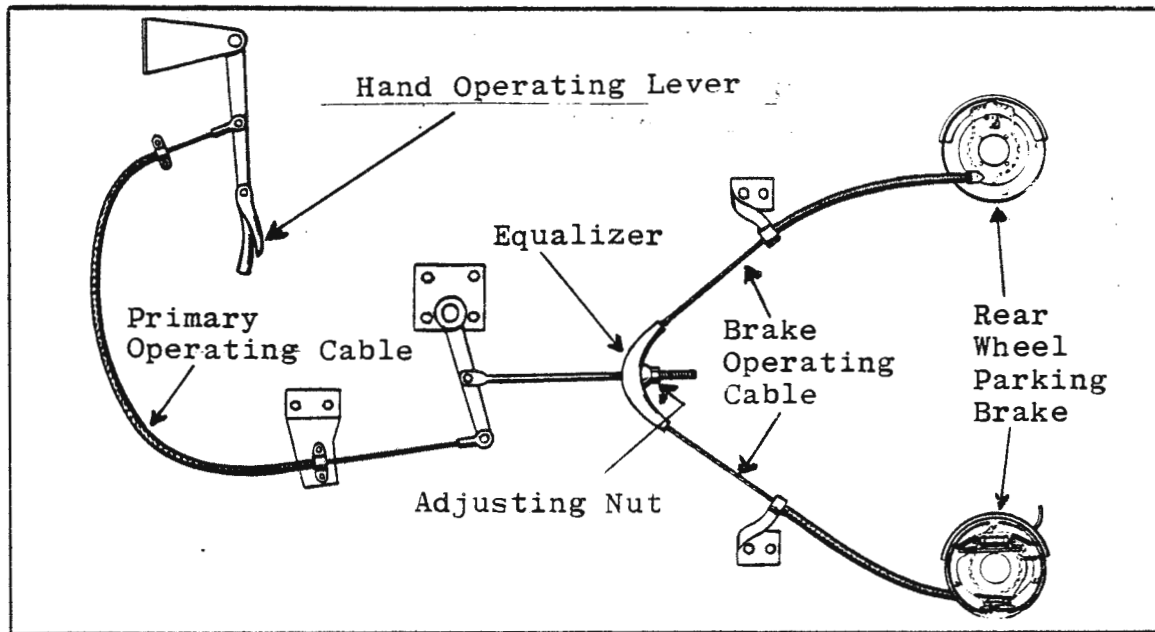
Integral Type Rear Wheel Parking Brake
